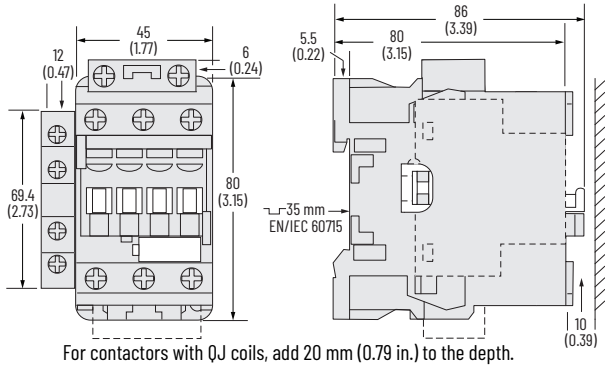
100-E26...100-E38 4-Pole Contactors with Standard Coils and Side-mounted Auxiliary Contact
